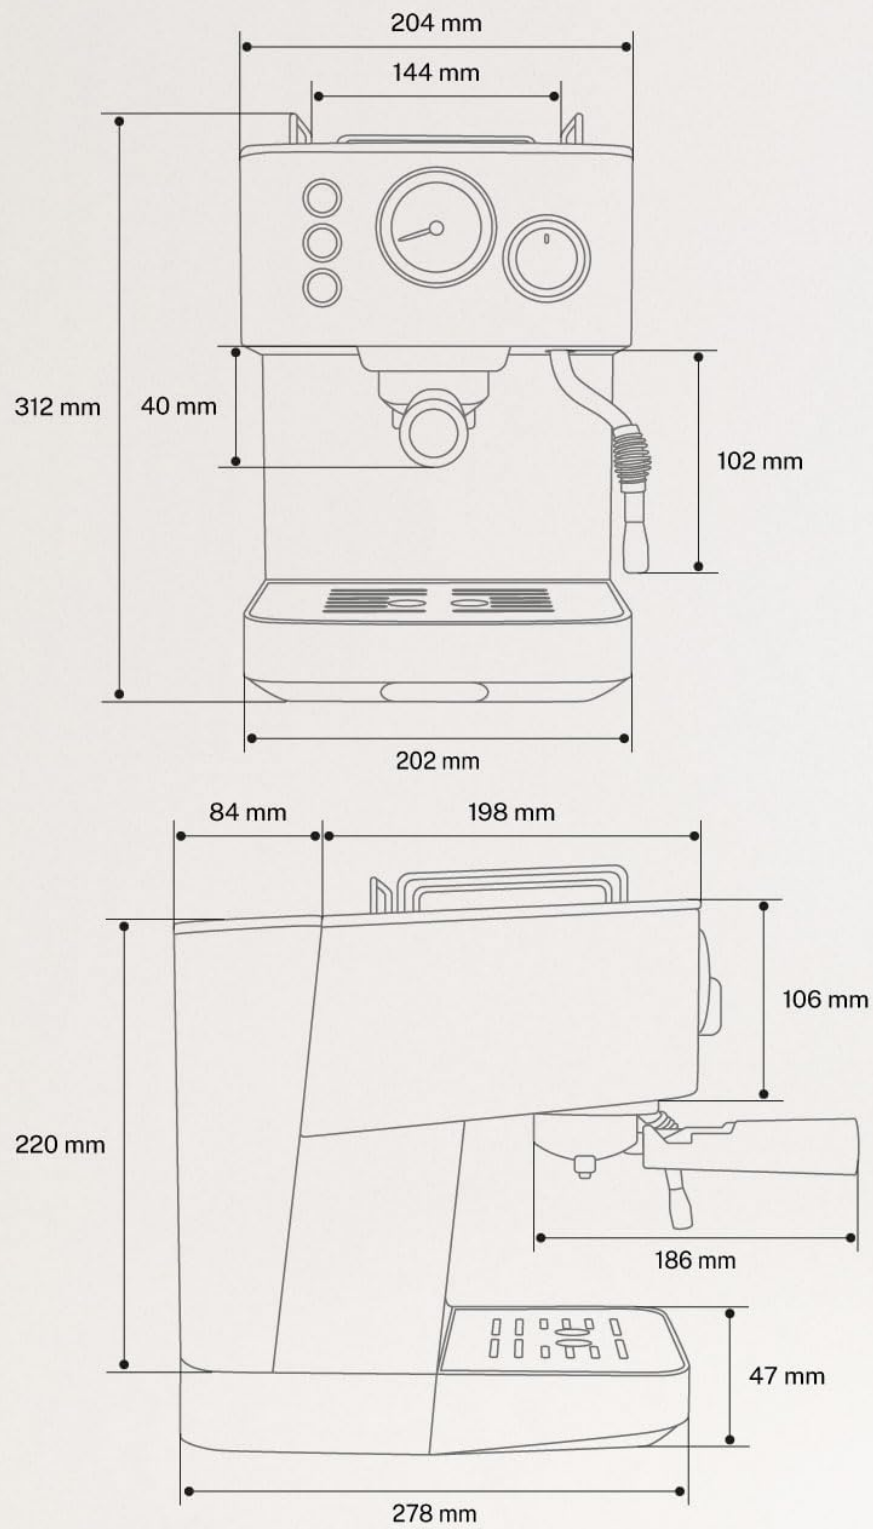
Dimensional drawing of the espresso machine, indicating height, width, and depth measurements.
